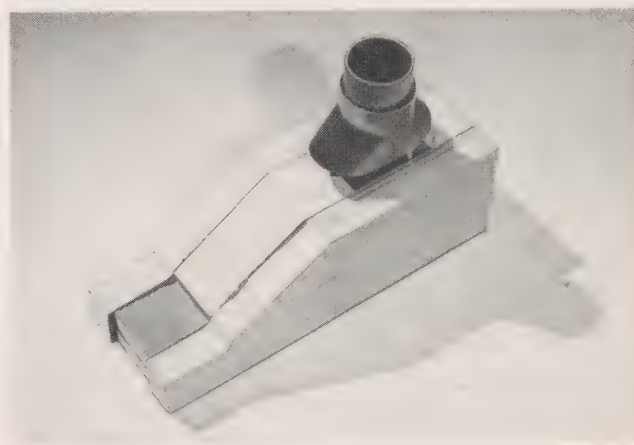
Foot core assembly with side blocks and ankle assembly attached.
